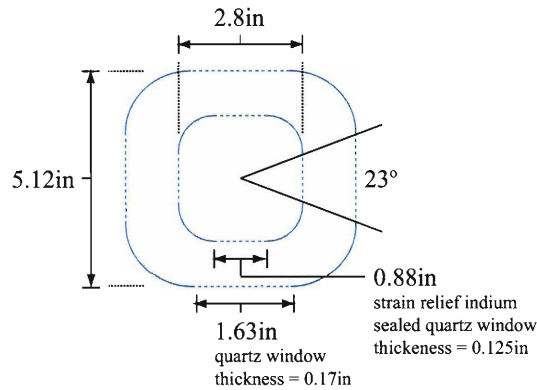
Dimensions of the STVP-100 cryostat sample chamber.
